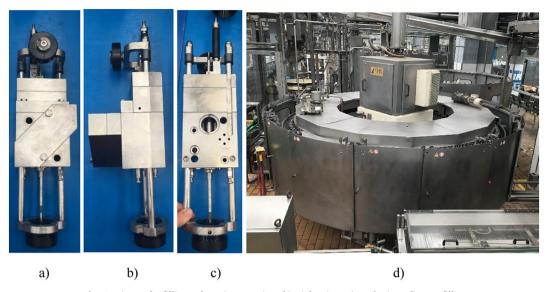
Views of a filling valve. a) Front view; b) Right view; c) Back view; d) Beer filler.
